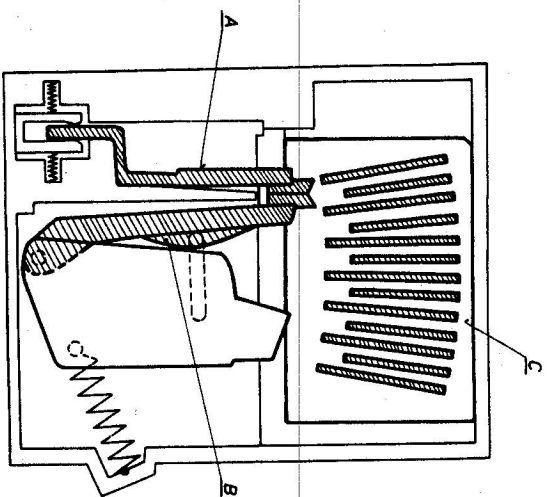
A simplified model-section of the JR2 limiting circuit breaker. A — the fixed, removable contact, B — the movable contact, C — the quenching chamber.
